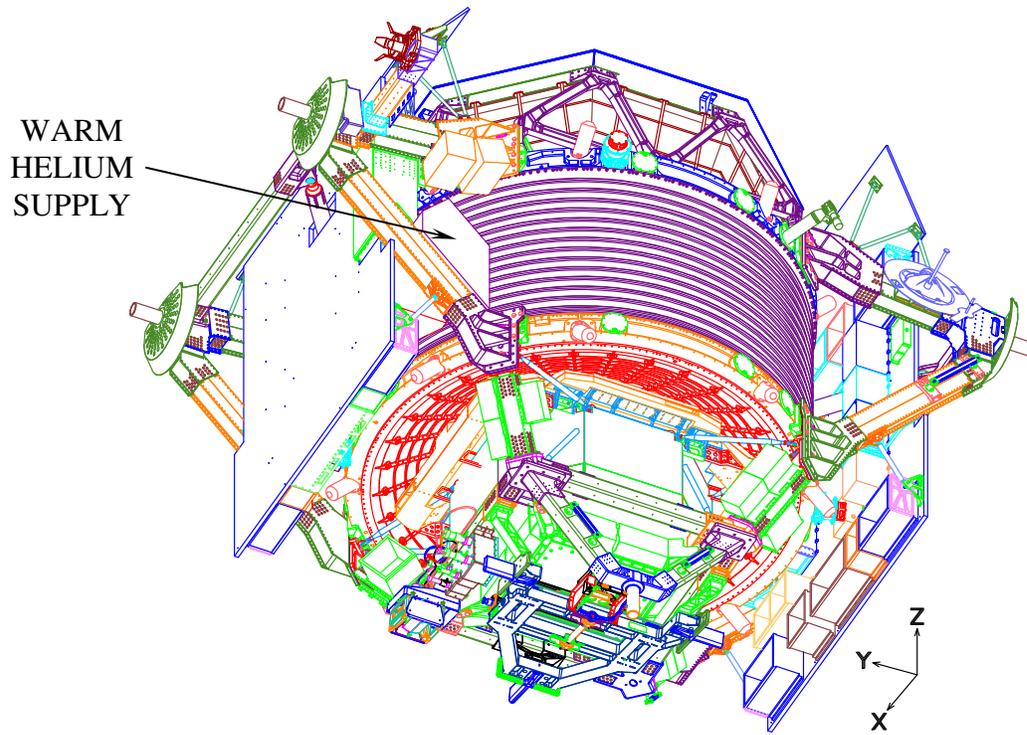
AMS-02 Payload Assembly (2 of 2)
